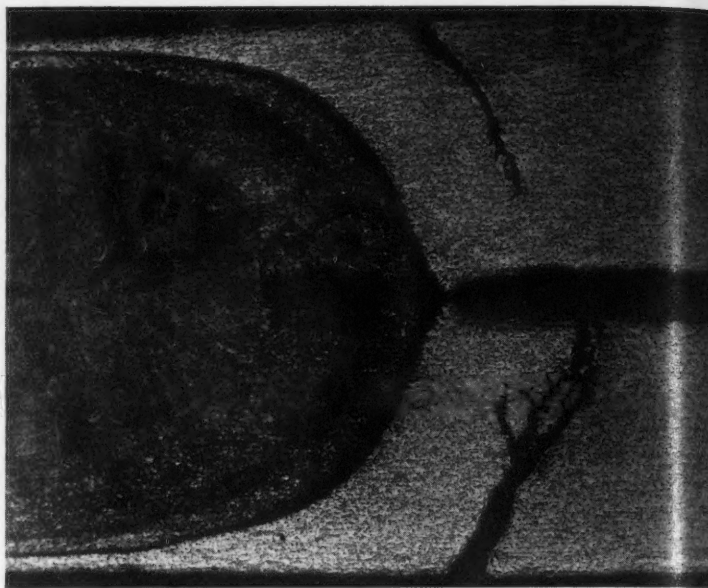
Transverse section through a series a) spot weld. Spot-weld perimeter cracking is seen to be removed from heat-affected zone. Keller's etch. 35X.
